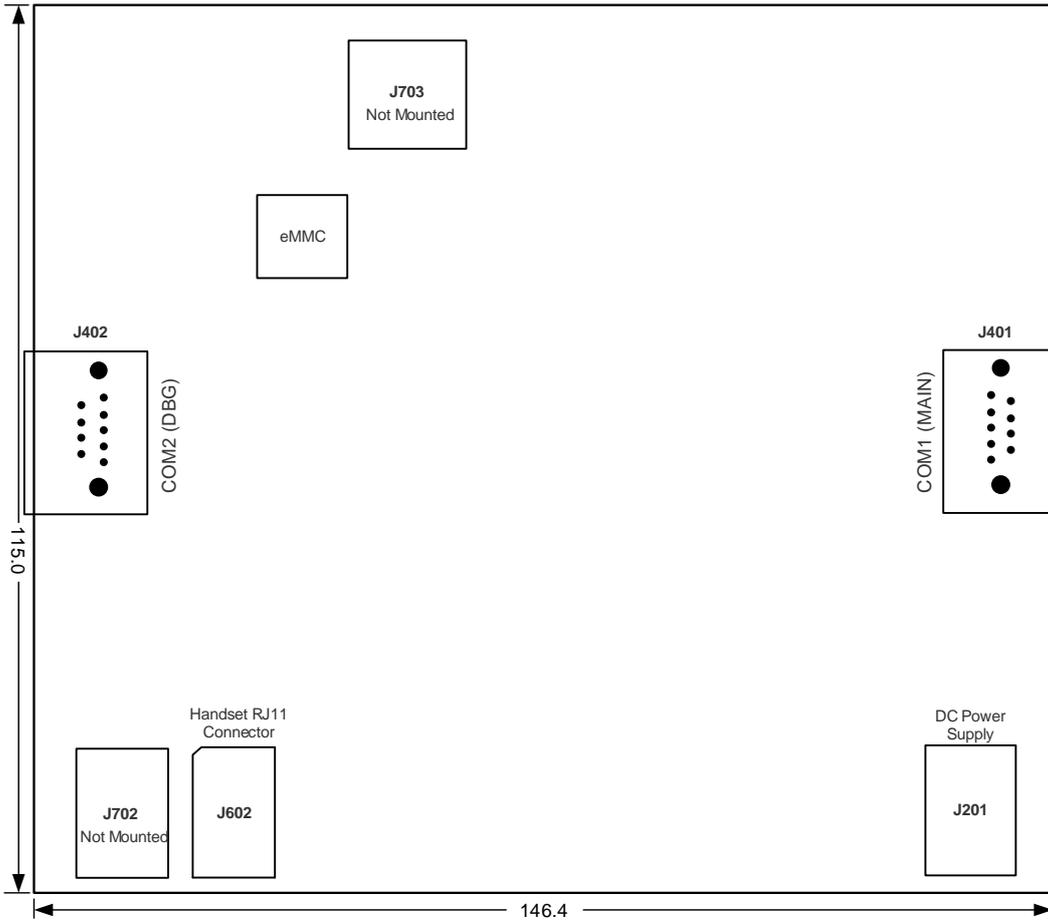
Component Placement of EVB Bottom Side (Unit: mm)
